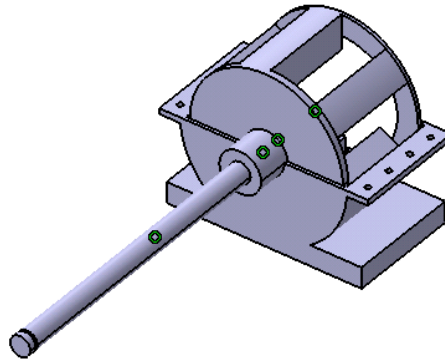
Position of the Motor Shaft with respect to the Blower shown from back side
